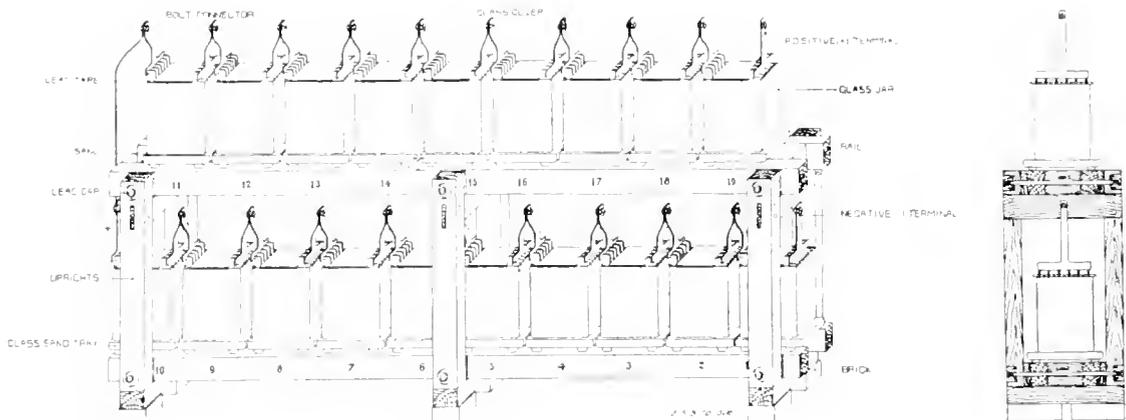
Typical Installation of Storage Battery on Wood Rack
